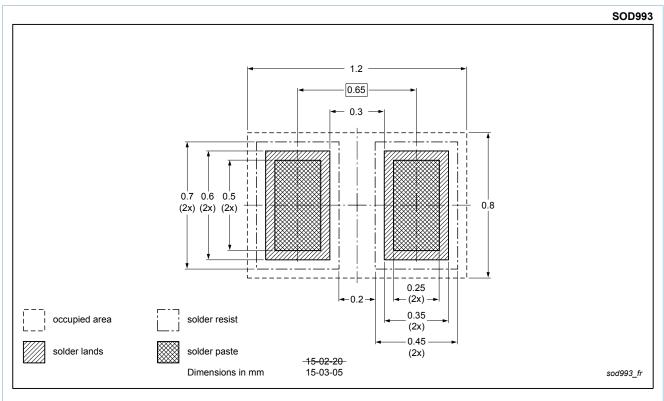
Reflow soldering footprint for DSN1006-2 (SOD993)
